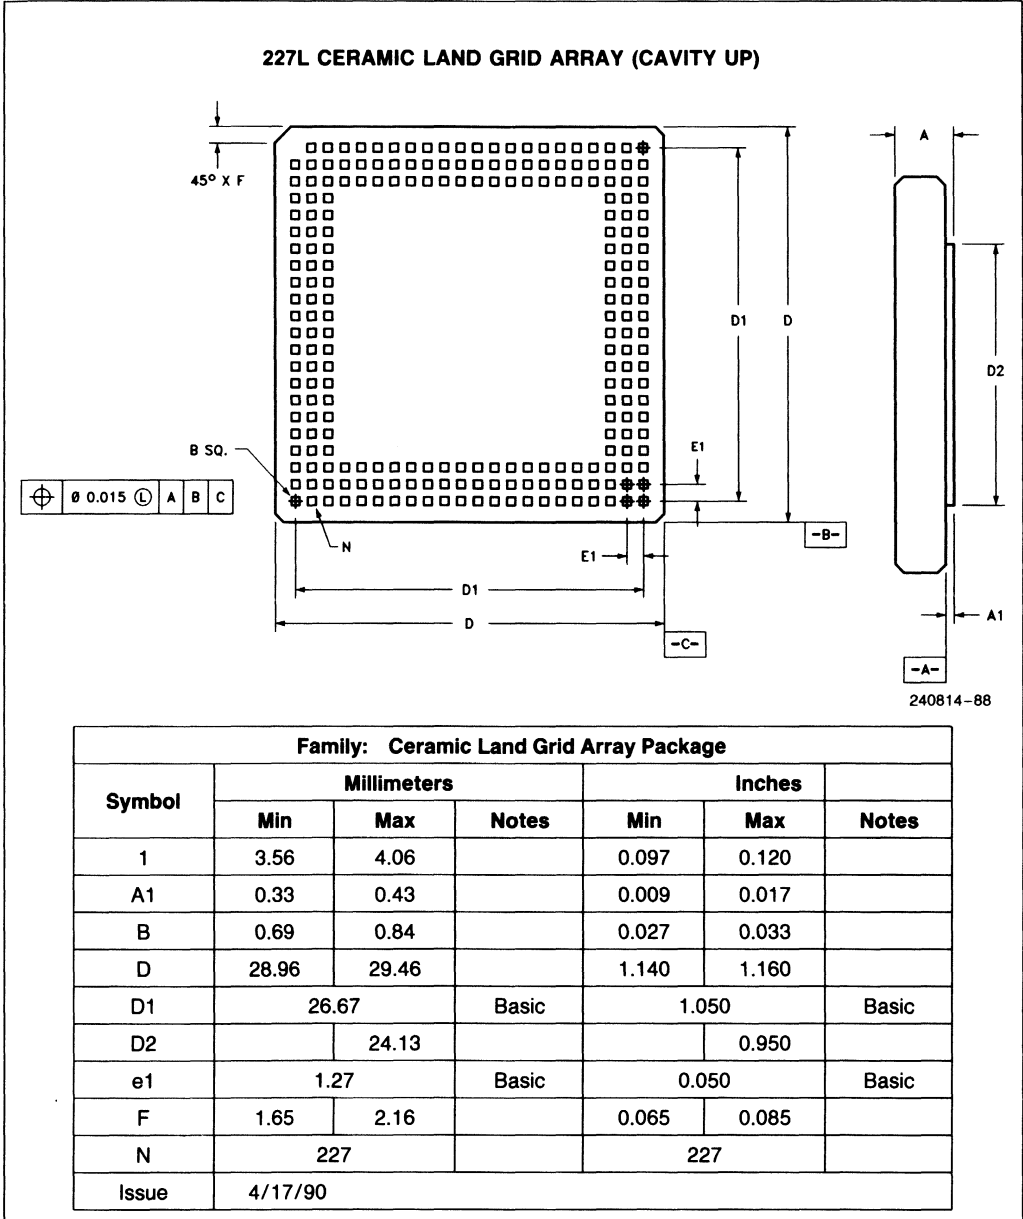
Principal Dimensions of the 386™SL CPU in a 227-Lead LGA Package
